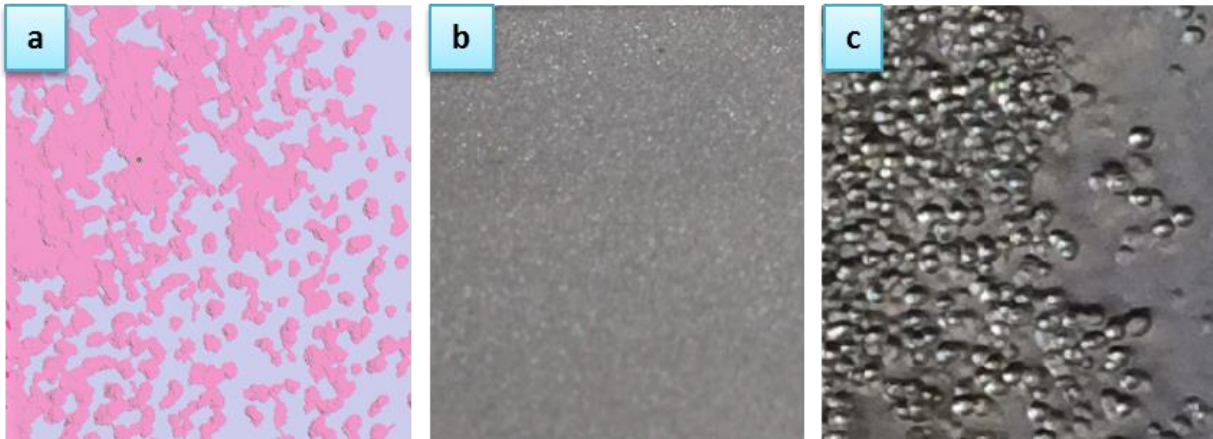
[a] Internal LOF identified by LayerDD [b] part surface right after EBM process which show no indication of defect [c] defect reveal after the part gone through HIP treatment and then chemical milled
